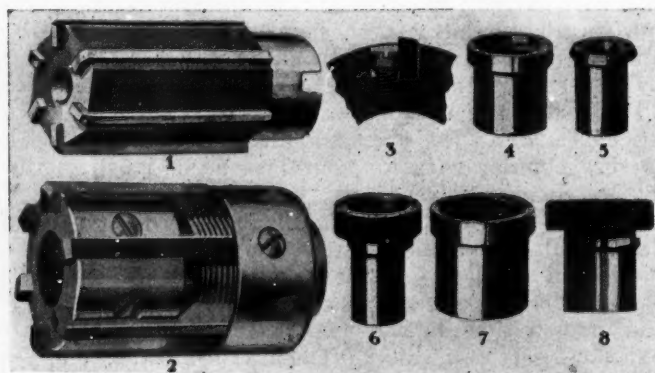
Conradson reamer, which has high speed steel blades mounted in a die cast body
